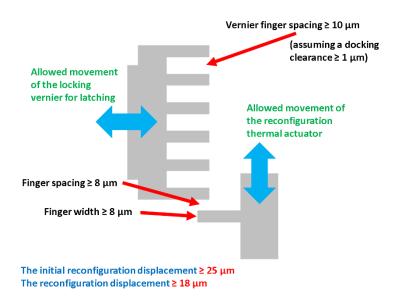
The latching or docking mechanism and typical geometrical dimensions imposed by the intra-layer design rules for the metal layer in the MetalMUMPs process
